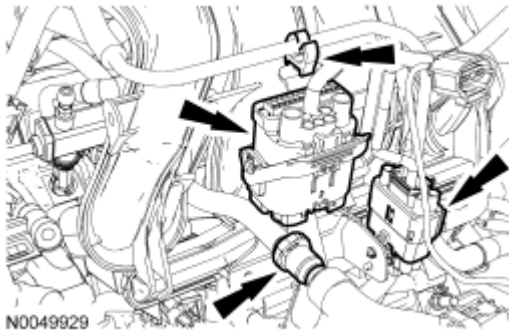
Locating Solenoid Control Wire & Nut
